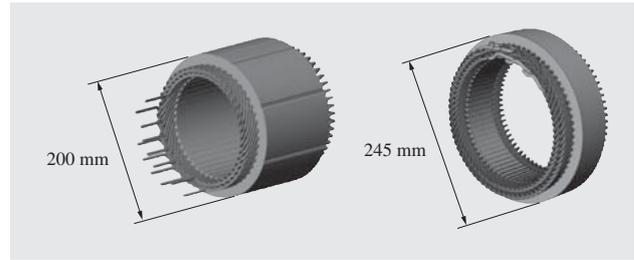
Dimensions of Standard Motor. The two standard stator core diameters selected were 200 and 245 mm.
